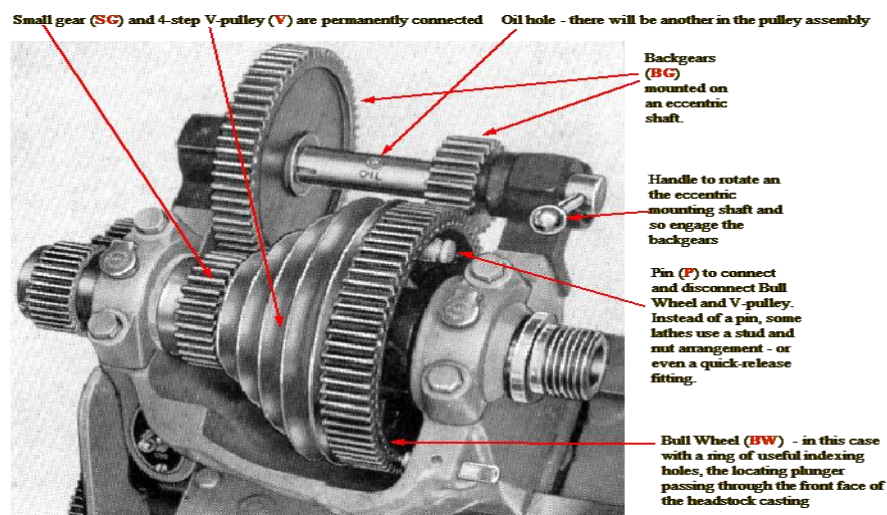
This is layout diagram of 1934 Atlas lathe which has the 4-step V-pulley (V) with a small gear (SG) permanently attached to its smaller end. The entire length of V-pulley and gear are bushed - and able to rotate freely on the headstock spindle.
